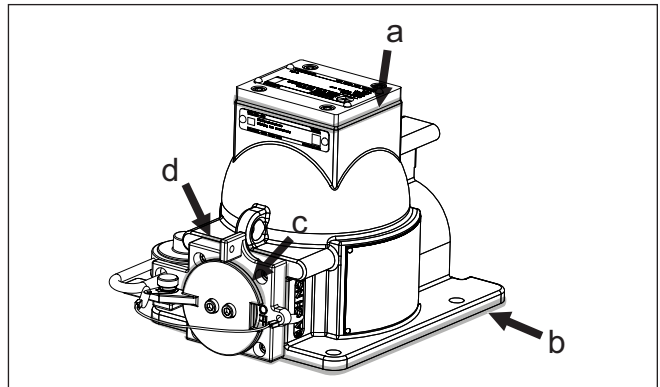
Wiping surfaces for the tightness test - manually operated source holder
